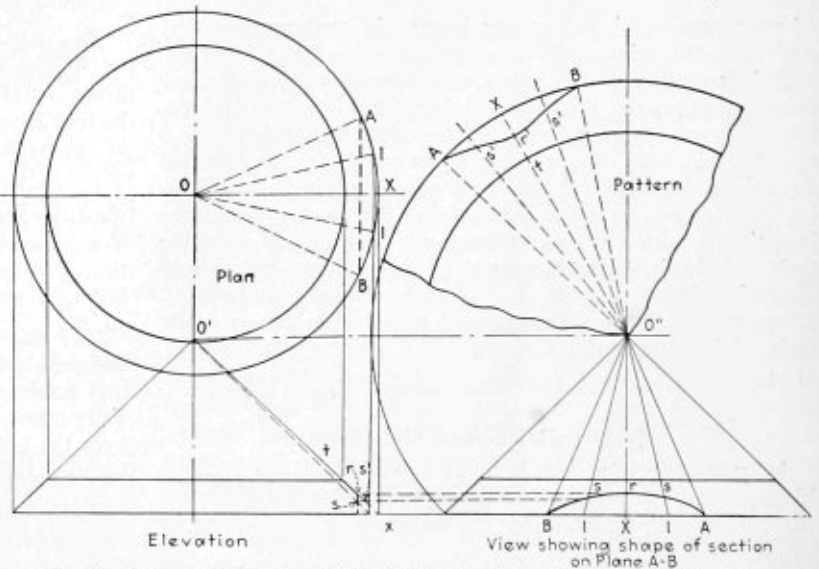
Plan and Elevation of Hood, Showing Layout of Cut-Out Section
